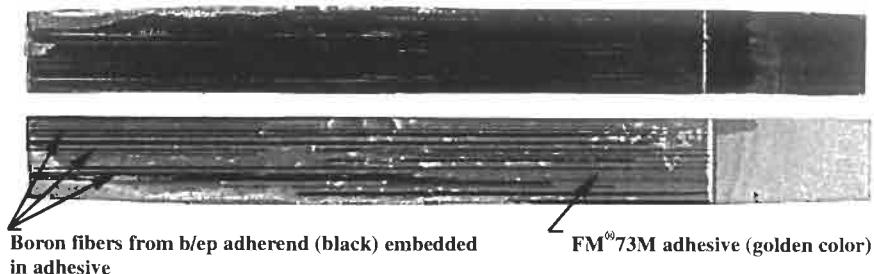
Fracture surfaces of the Al-FM[®]73M-b/ep bonded system.
